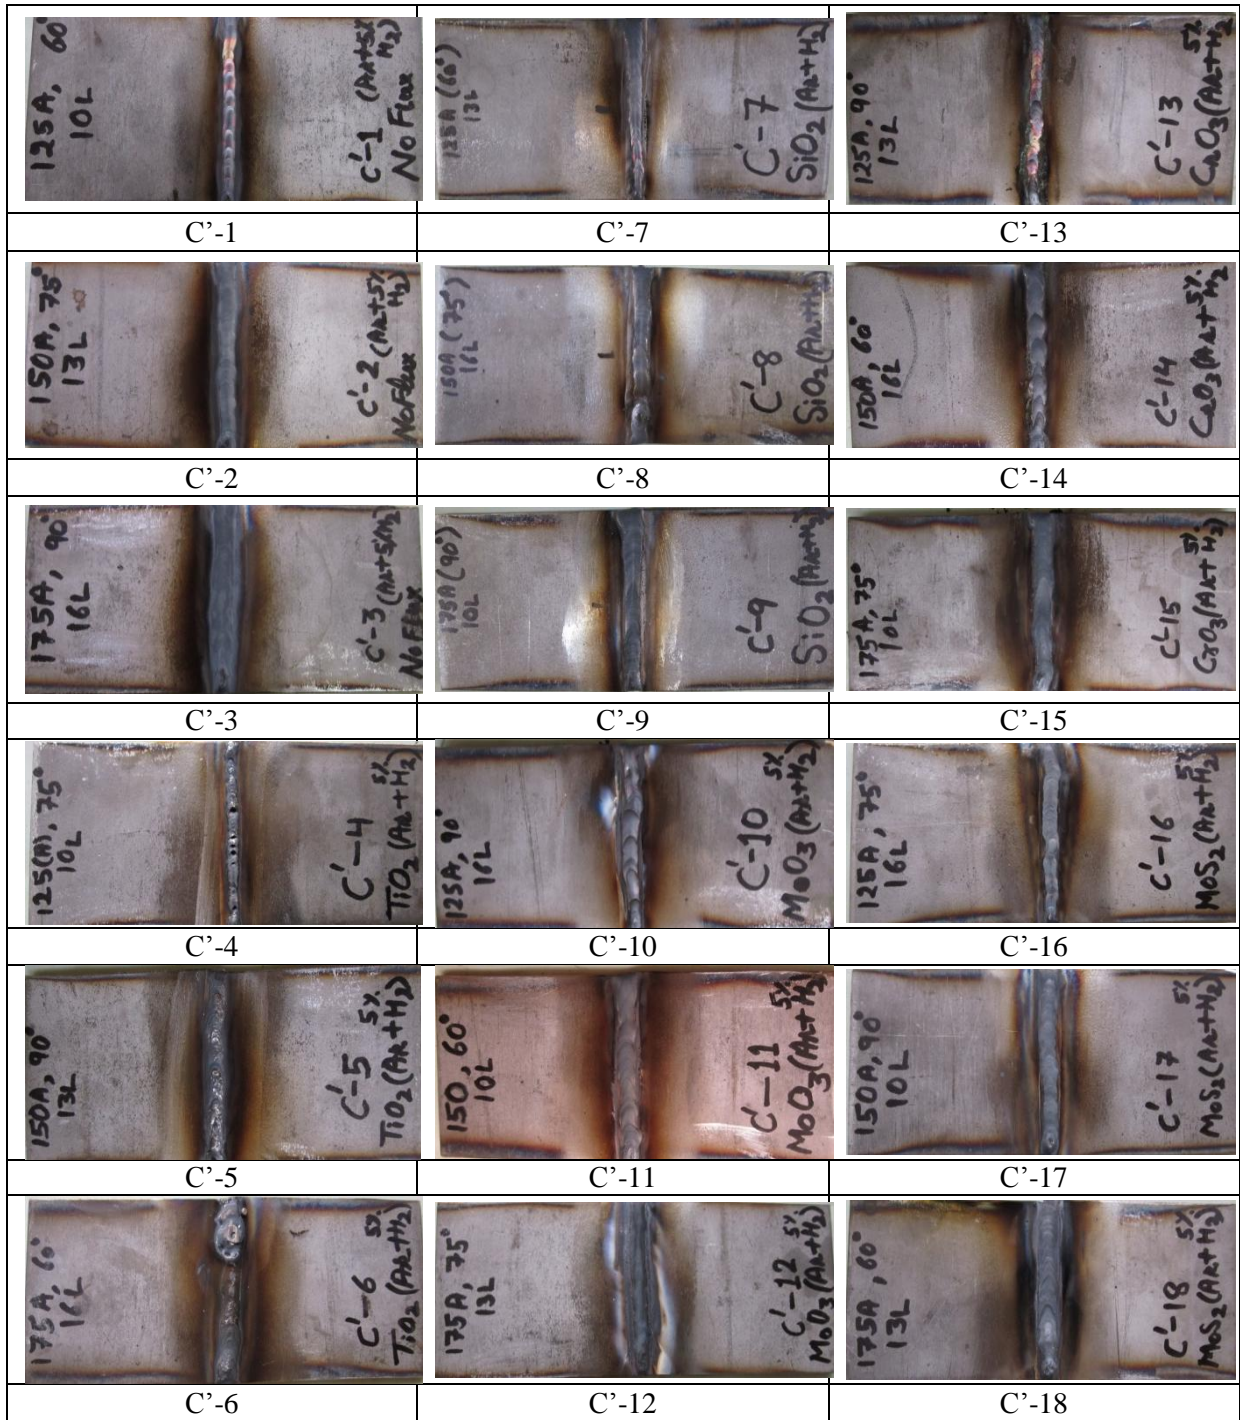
Macrograph showing the weld bead appearance of A-TIG welding of AISI 304 Under Ar+5% H₂
